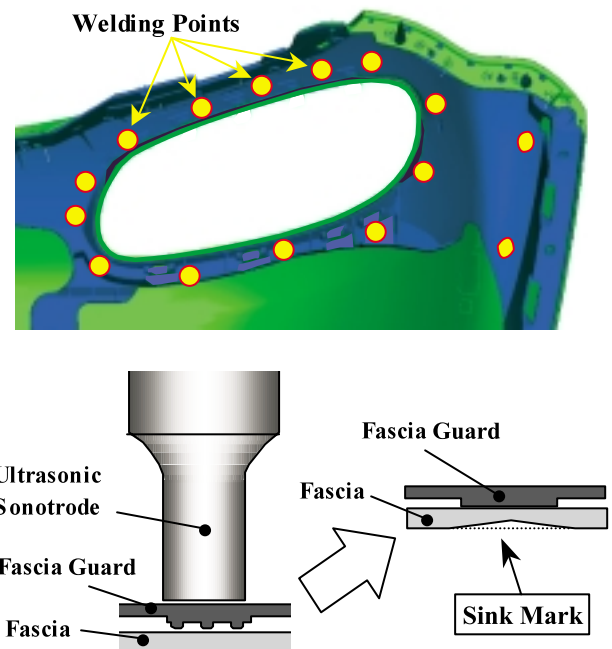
Bonding Process by Ultrasonic Welding
